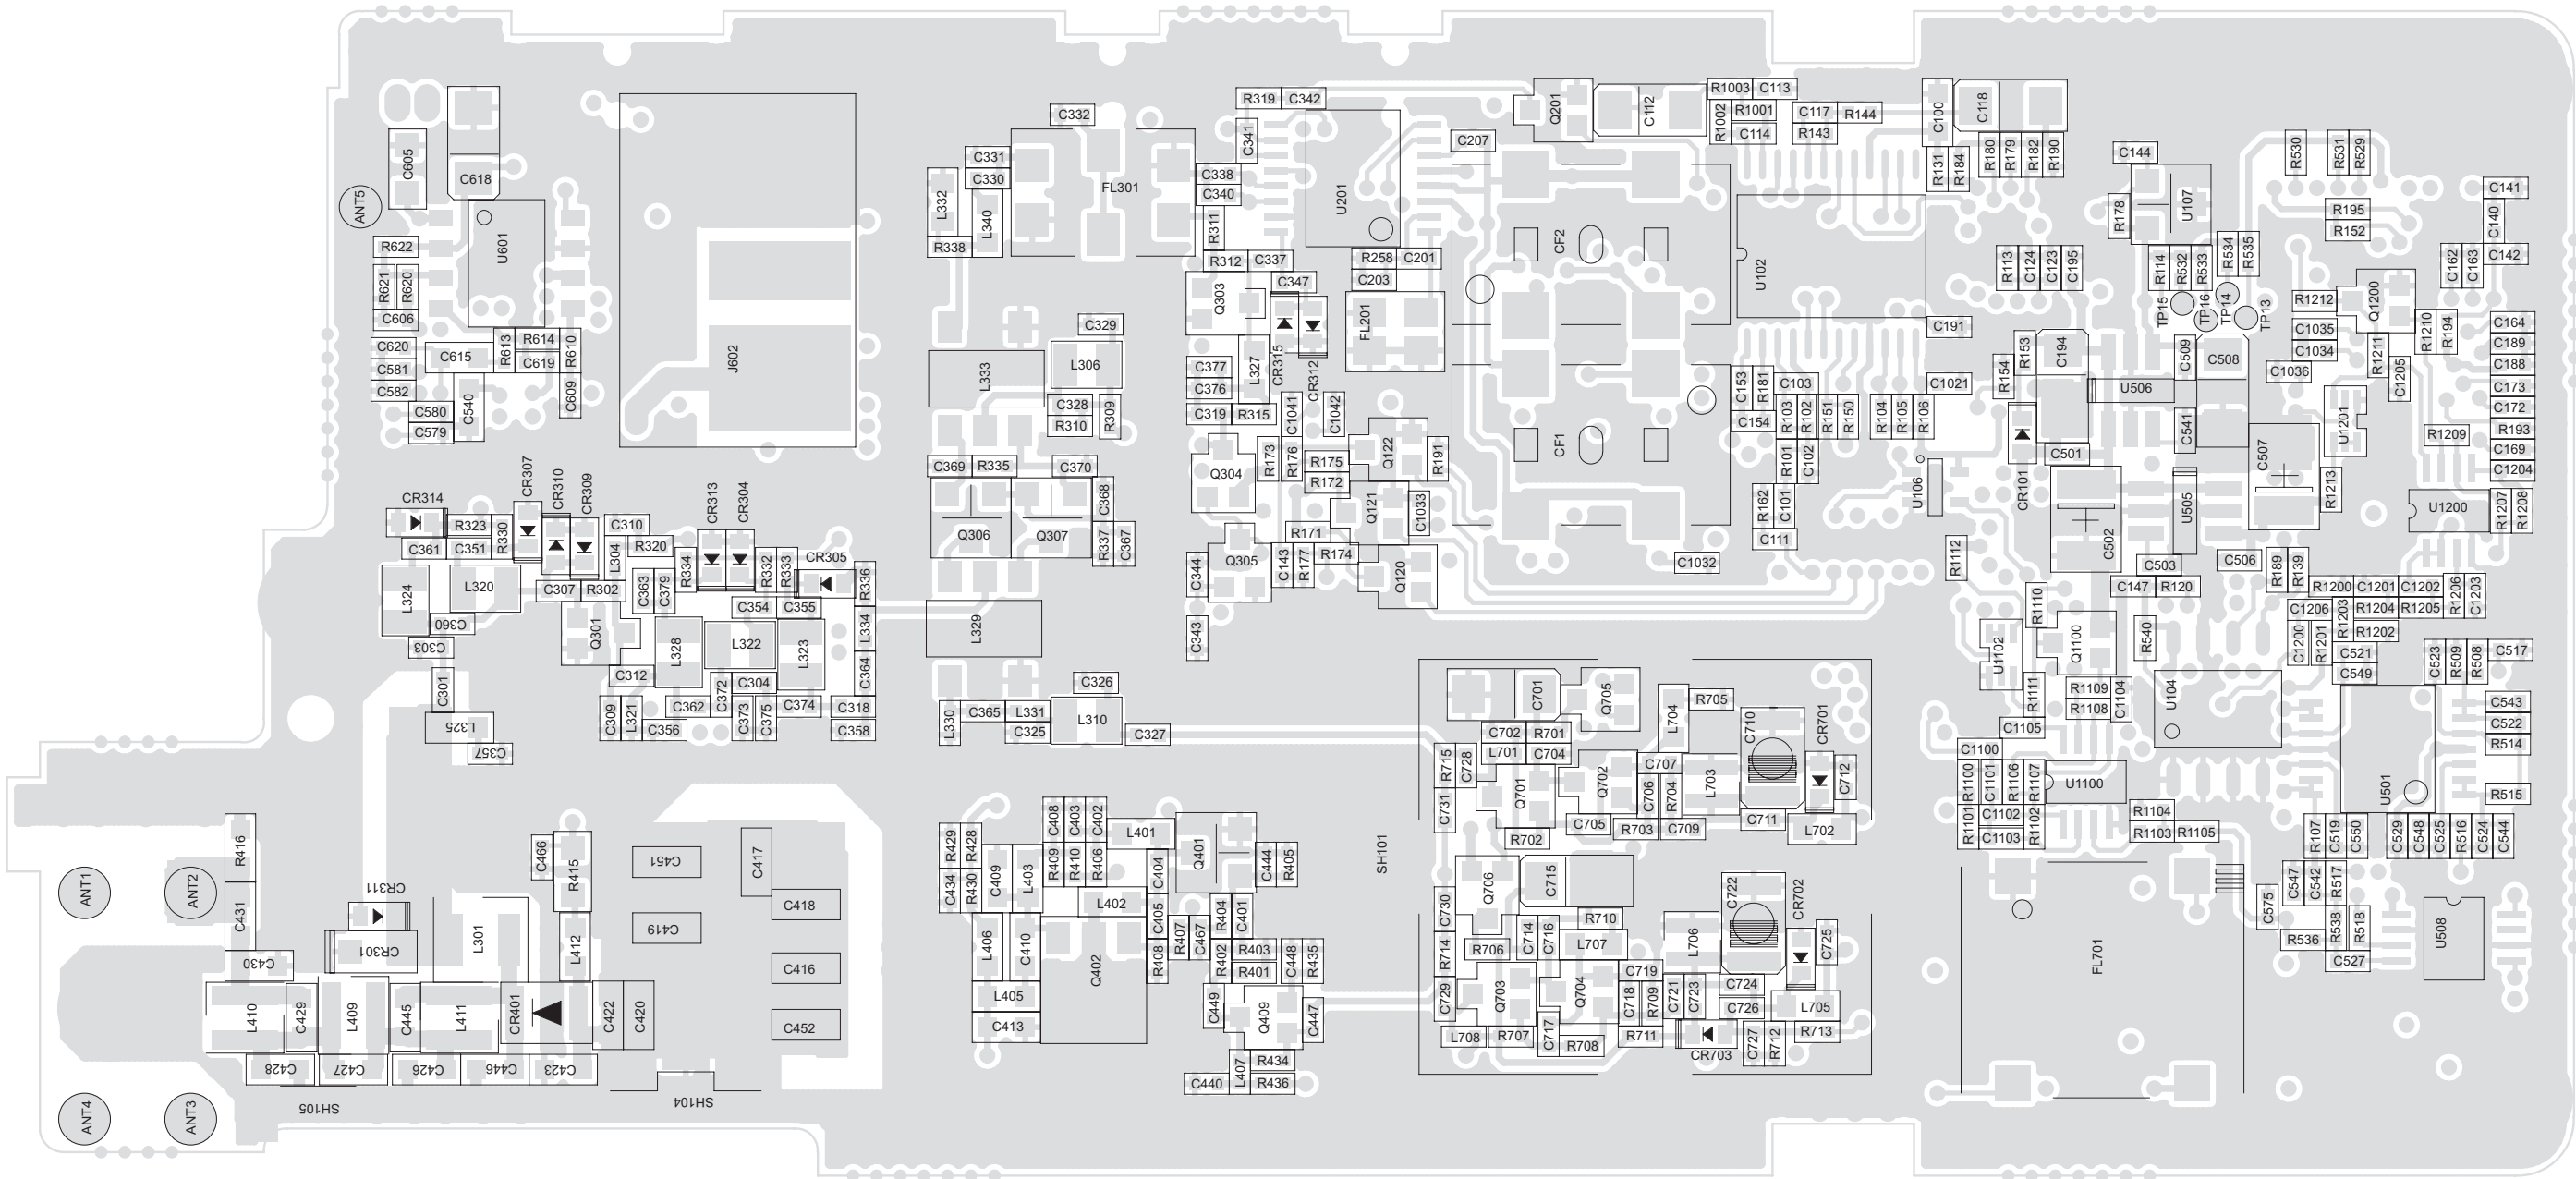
UHF2 (435–480 MHz) Mainboard Bottom Side: PCB No. E11-000947-00
